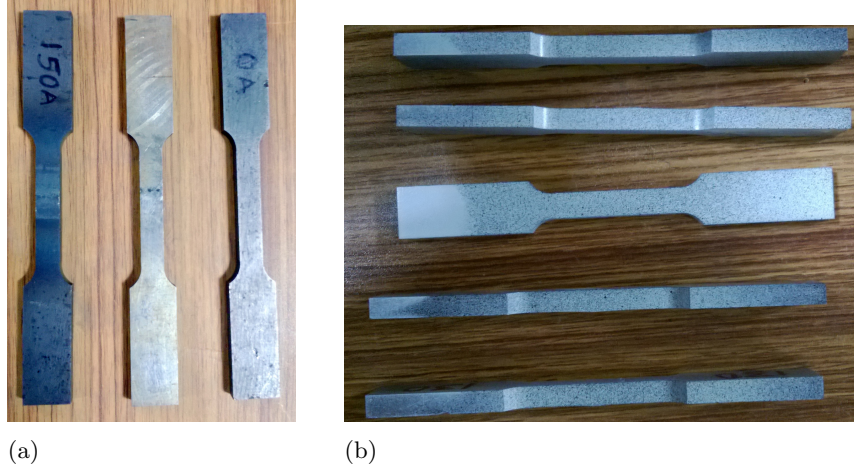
Weld specimens used for testing (a) specimens without speckle pattern (b) specimens with speckle pattern.
